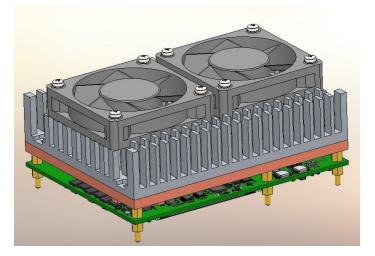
CPC1302 with the installed heat removal set ACS30076-02
